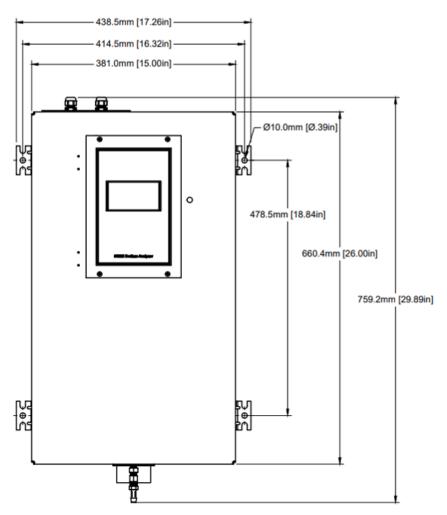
Dimensions to mount the Wet Section (All dimensions in inches).
